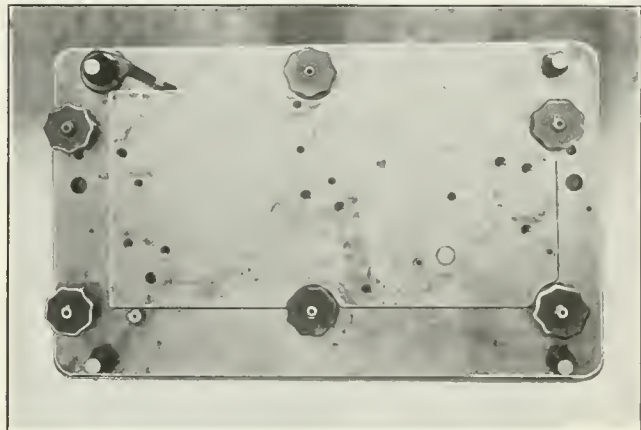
The Jig shown in Fig. 9 with a Mask Plate mounted on it ready for the Multiple-spindle Drill
